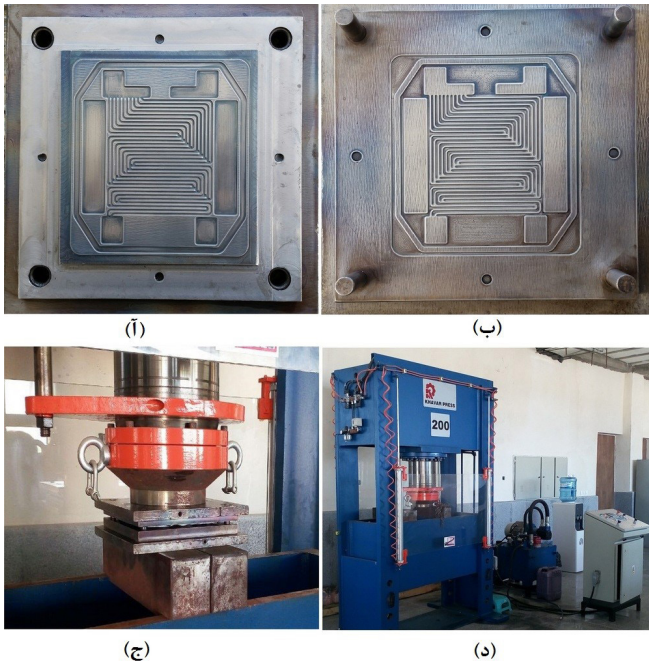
Forming die and laboratory equipment, (a) cavity, (b) core, (c) assembly die set, (d) view of 200 ton press.
